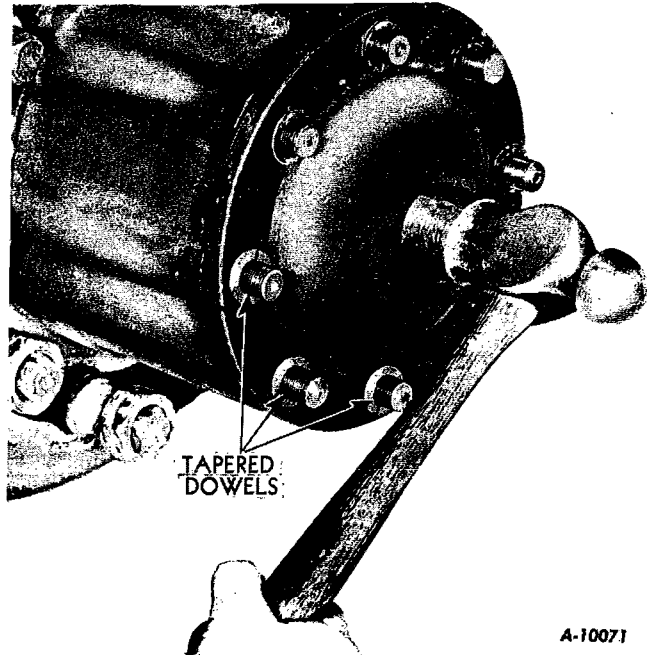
Using a heavy hammer, strike sharply on the center of the flange of the axle shaft. This will unseat and loosen the tapered dowels in each stud hole.
